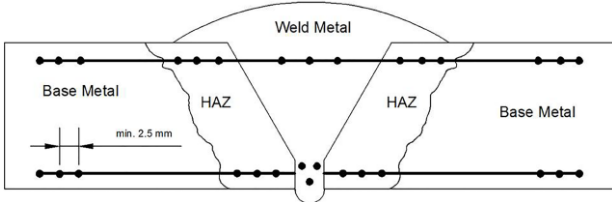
Schematic hardness measurement of welded material according to EN 9015-1 standard [16]
